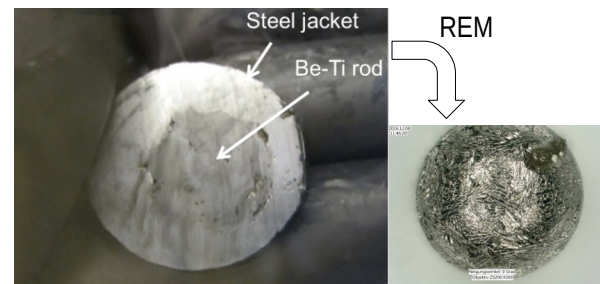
Fabrication of Be-Ti. Left: hot-extruded rod of Be-Ti in steel jacket. Right: Be-Ti pebble produced by REM.
